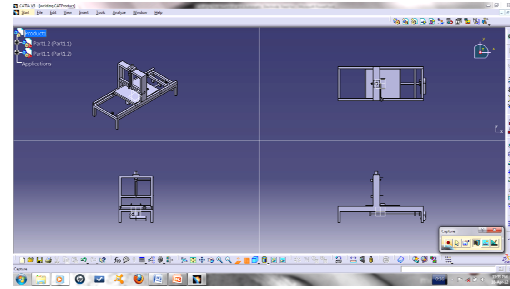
Catia drawing of slide mode control and automatic electrode feed for arc welding (multi view)
